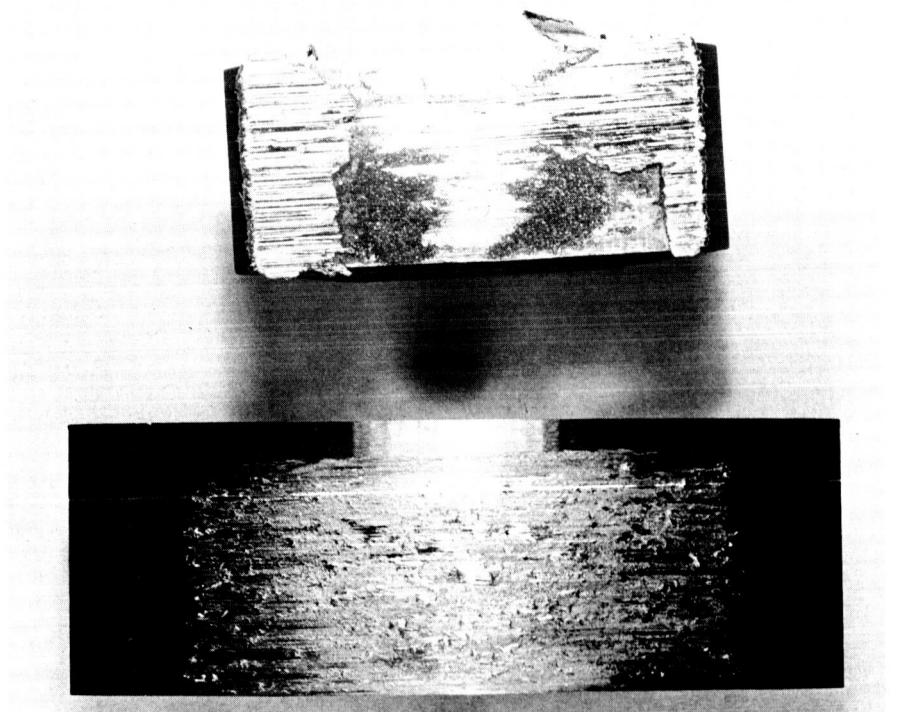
BALL JOINT TEST SPECIMEN TYPE - 16;
